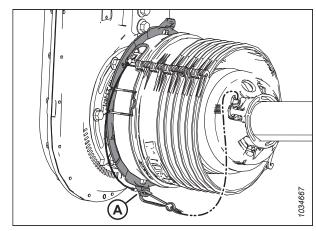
Chain Secured to Driveline on Float Module Gearbox
